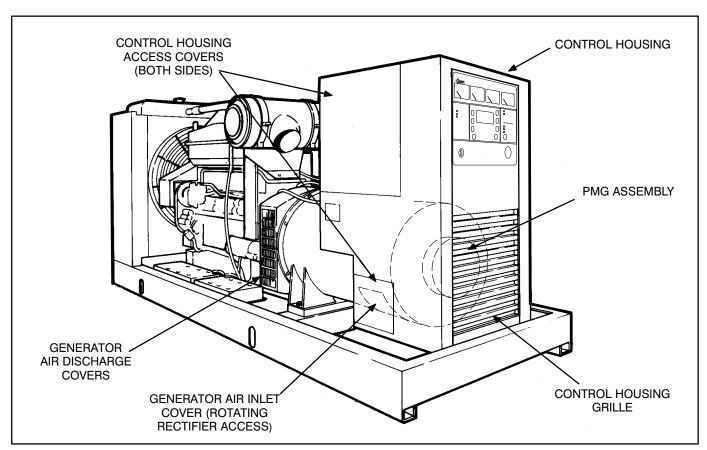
GENERATOR AND CONTROL HOUSING ASSEMBLY
